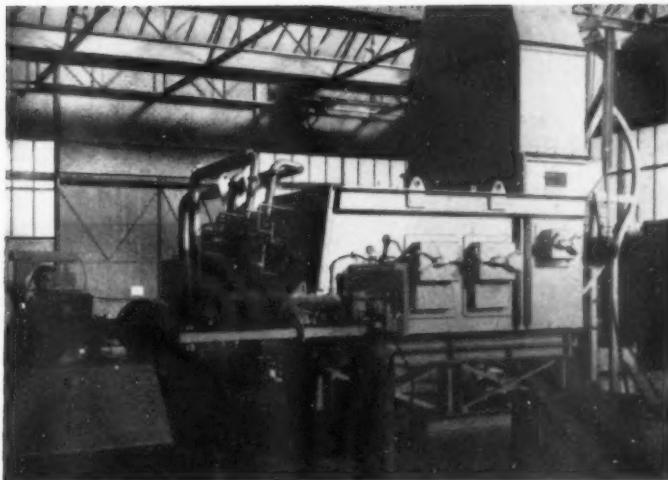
(left) Sklenar melting furnace. At the front of furnace, oil burners. Side of furnace from left to right, pouring spout with automatic flow control. Behind this, three cleaning doors. At back of furnace, the furnace charger
